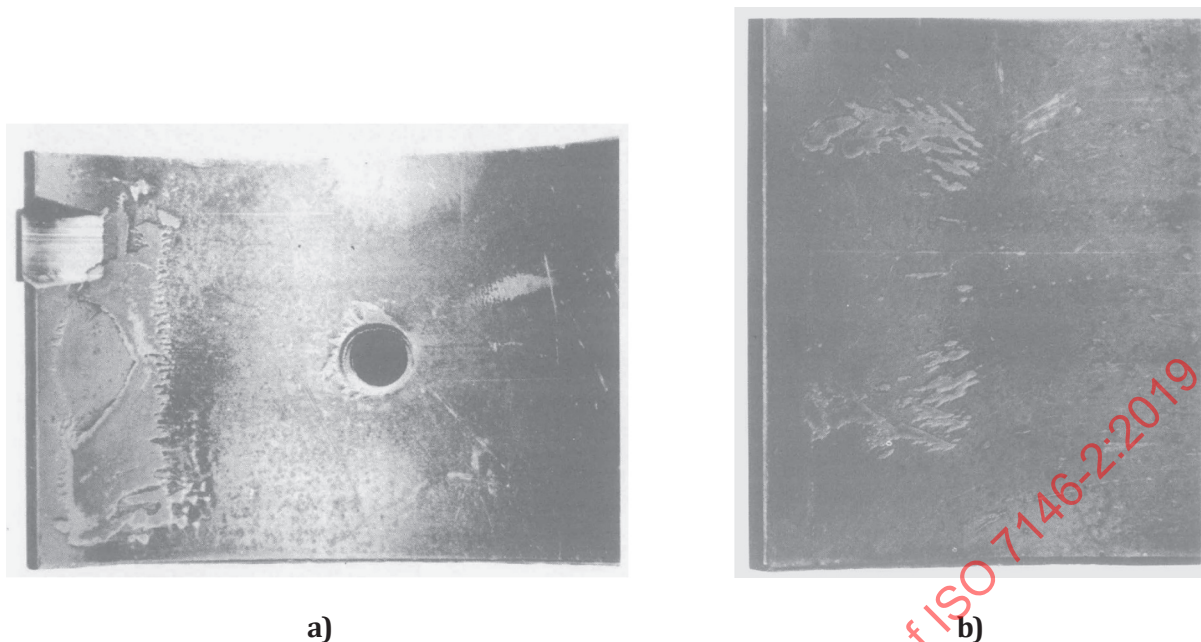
Flow cavitation erosion on both groove sides of the lower half of a center main bearing in a turbo charged 6-cylinder diesel engine
